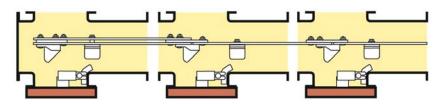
Busbar assembly, left end panel (example: 1250 A)
